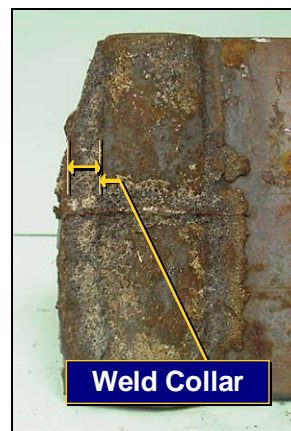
Bottom view of weld fracture shown in Figure 2 illustrating the location of the fracture relative to the weld collar.
